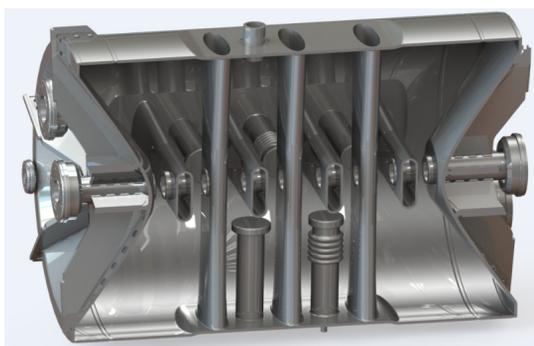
Sectional drawing of the short cavities for CM1 [26].
